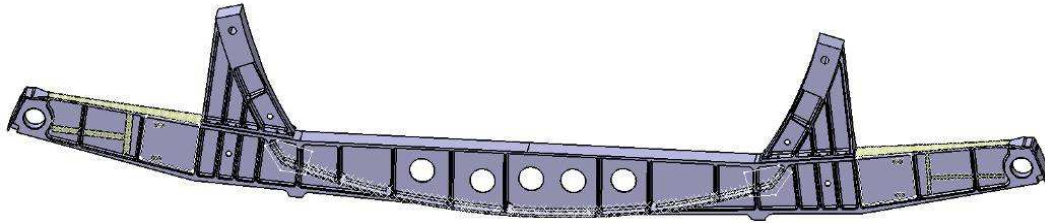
Entire assembly of a critical undercarriage spar with attached parts.
